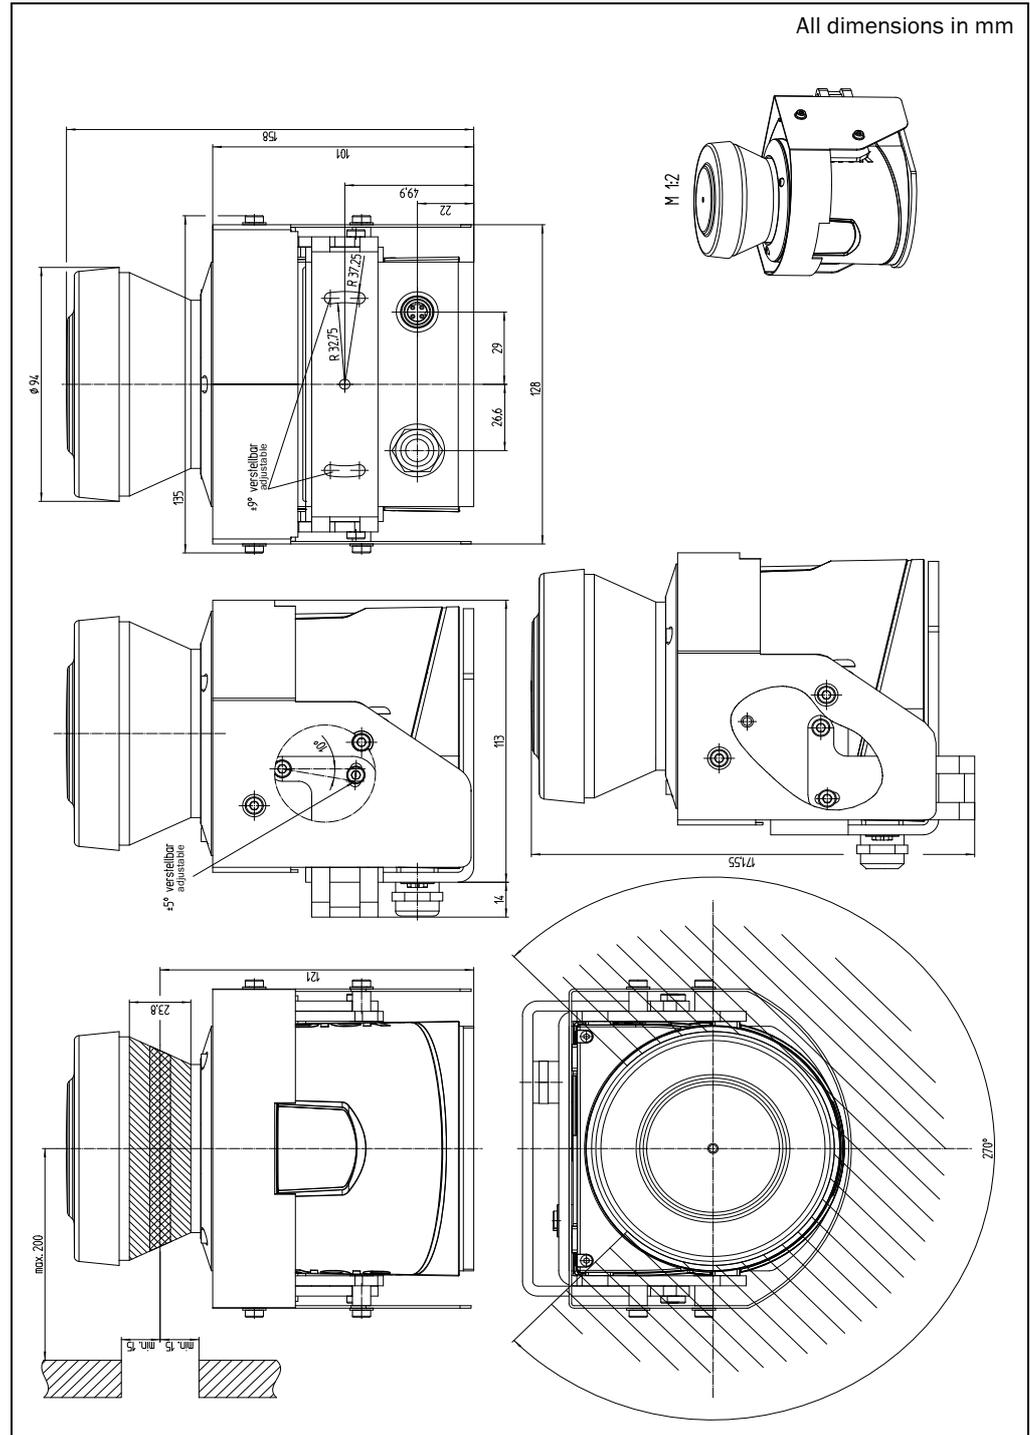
Dimensional drawing LMC12x with VdS mounting kit 2
